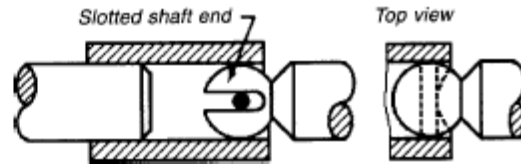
A pinned-sleeve shaft-coupling is fastened to one shaft that engages the forked, spherical end on the other shaft to provide a joint which also allows for axial shaft movement. In this example, however, the angle between shafts must be small. Also, the joint is only suitable for low torques.
